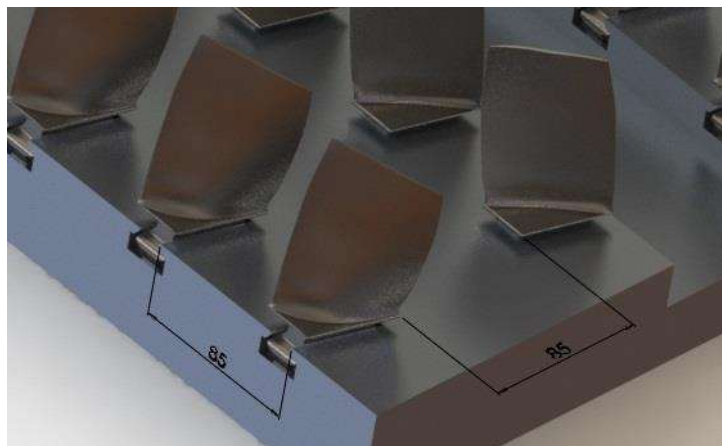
Blade Display Dimensions for 1<sup>st</sup> Stage Tool
